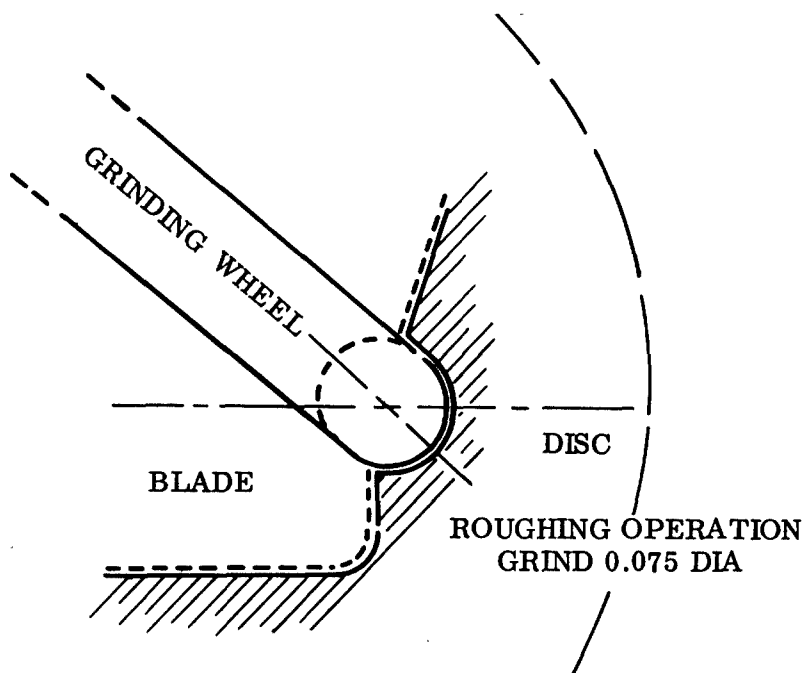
Turbine Disc and Blade Pin Attachment - Rough Machining.
